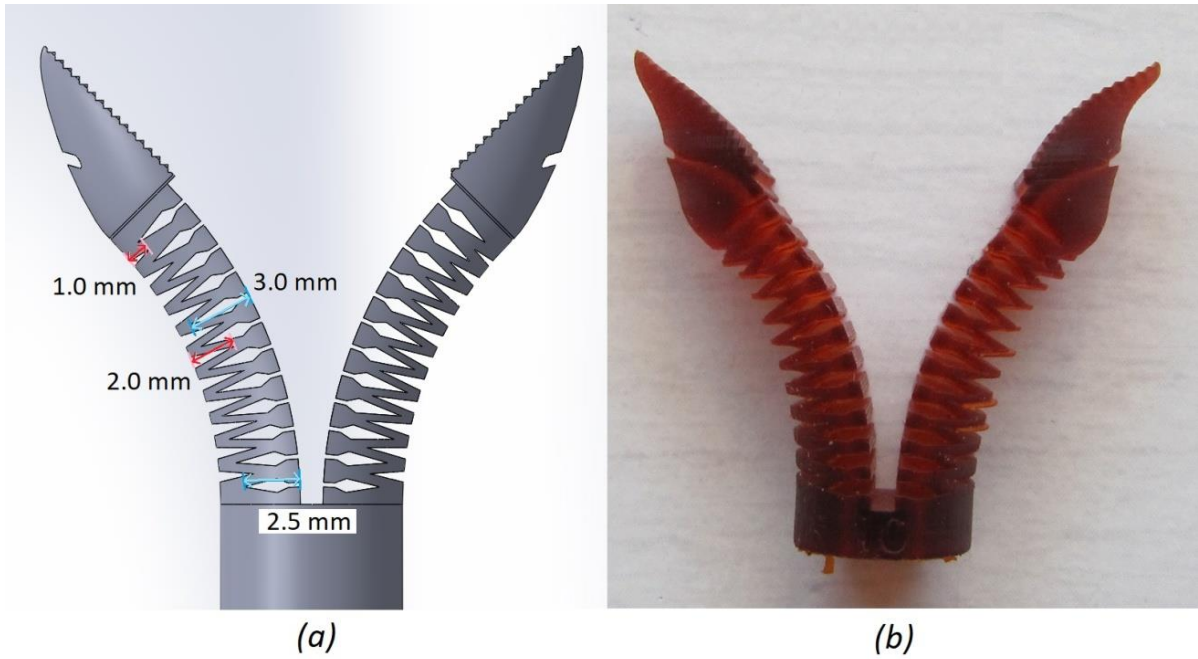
Part made in iteration round III. (a) Front-view of digital drawing with varying groove-dimensions (inside grooves: 2.5-3.0 mm, outside grooves: 1.0-2.0 mm) , (b) front-view of 3D-printed part.
